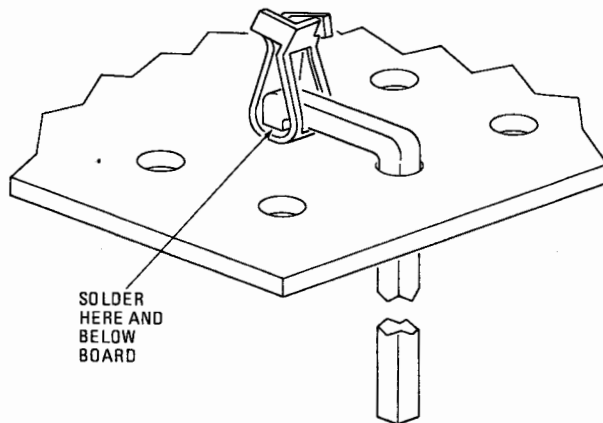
HOW MOLEX SOLDERCON AND VECTOR J-PIN can be united to form one terminal of a socket for an IC.
